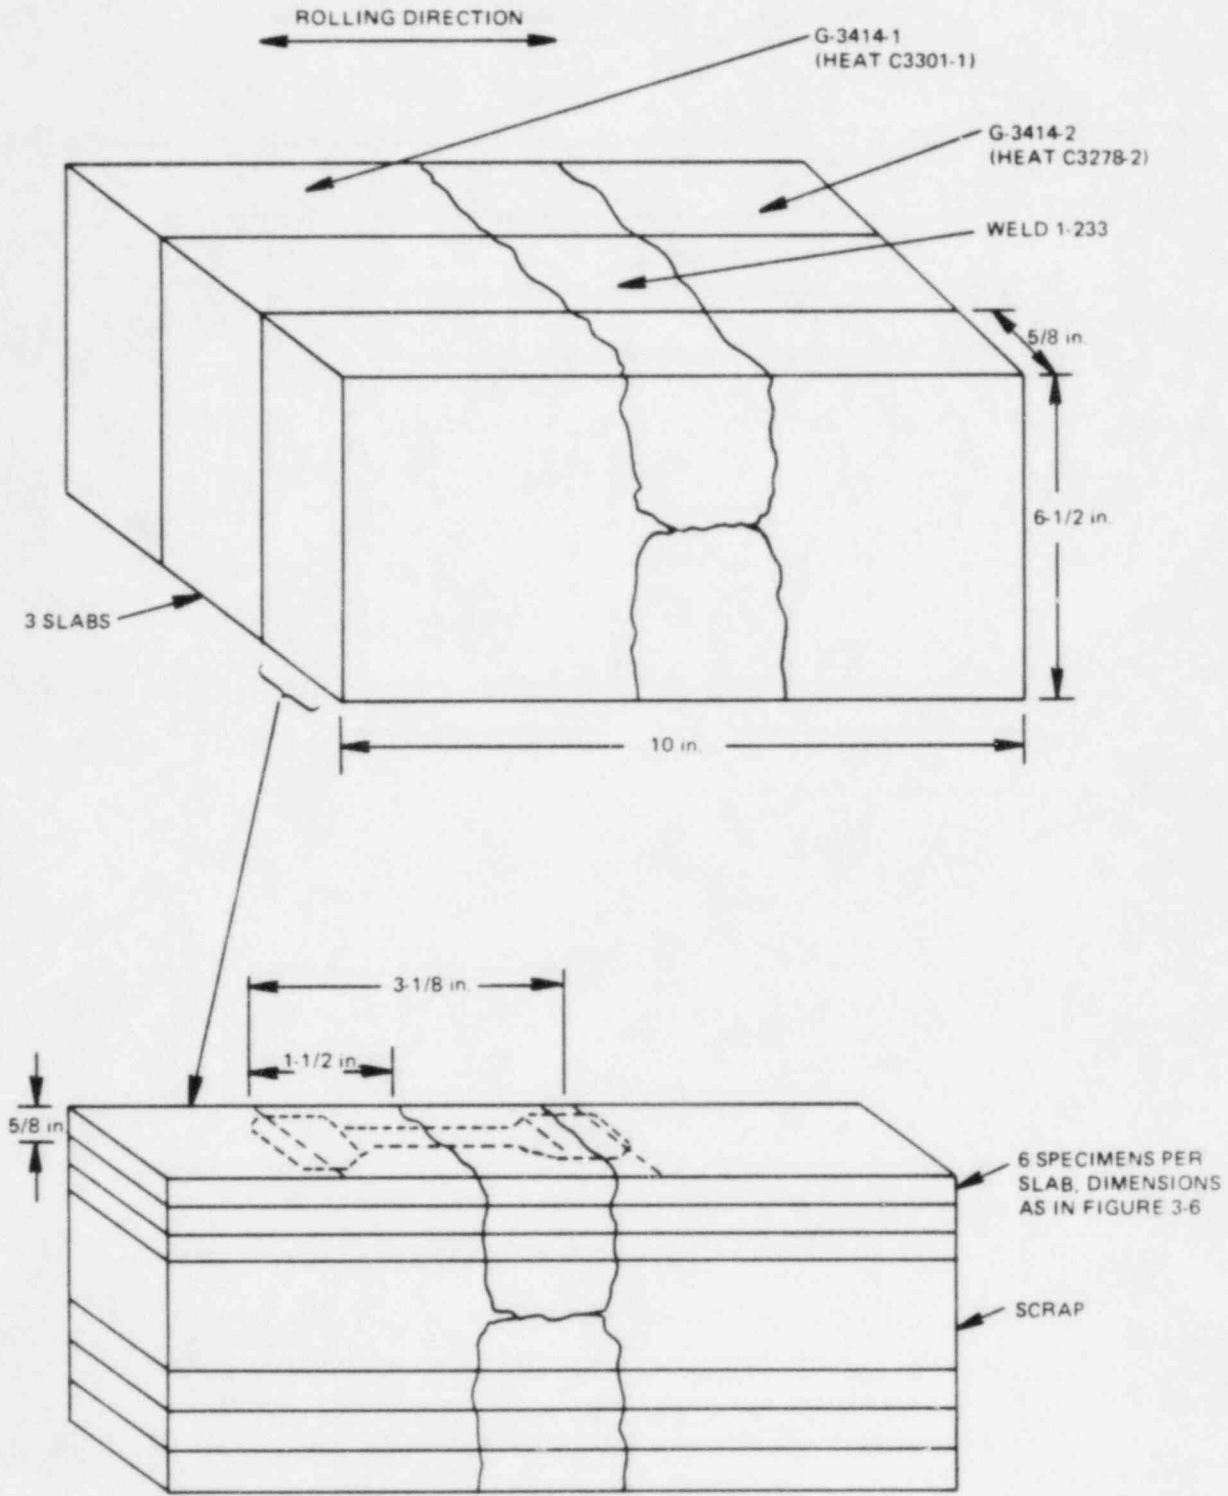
Fabrication Method for HAZ Tensile Specimens
